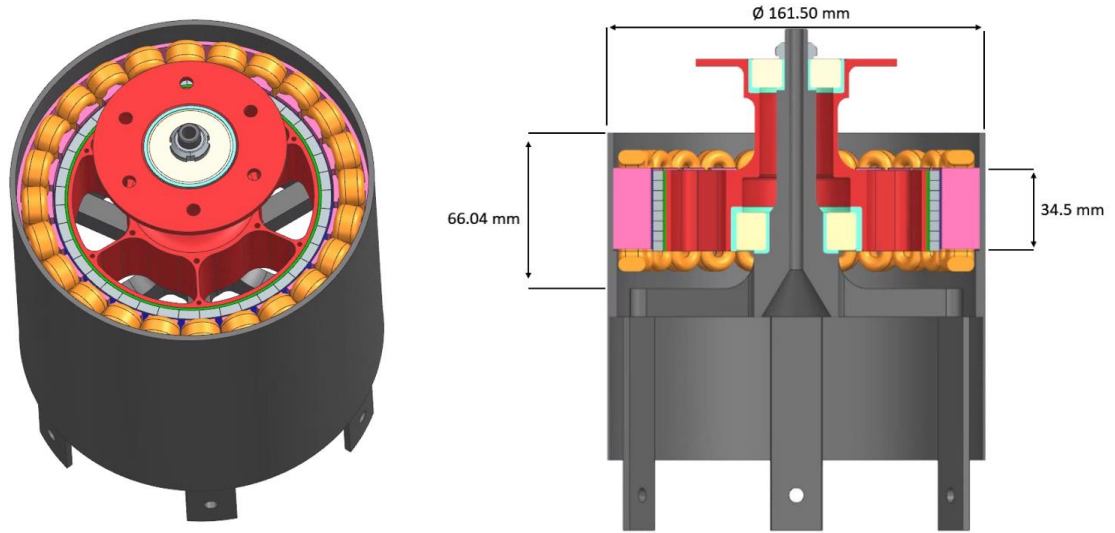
Reconstructed NASA HLM, angled view (left), cross-sectional view (right)
